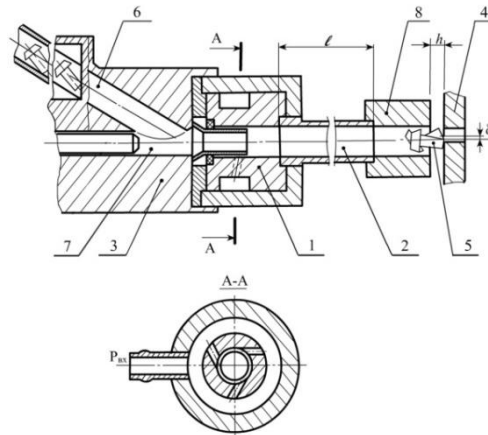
Schematic diagram of the device for installation elements in holes: 1- pneumovortex head;2- tube;3- branch pipe;4- detail;5- rivet;6- channel for feeding rivets;7- channel for passage of the rod of the riveting punch;8- hub.
